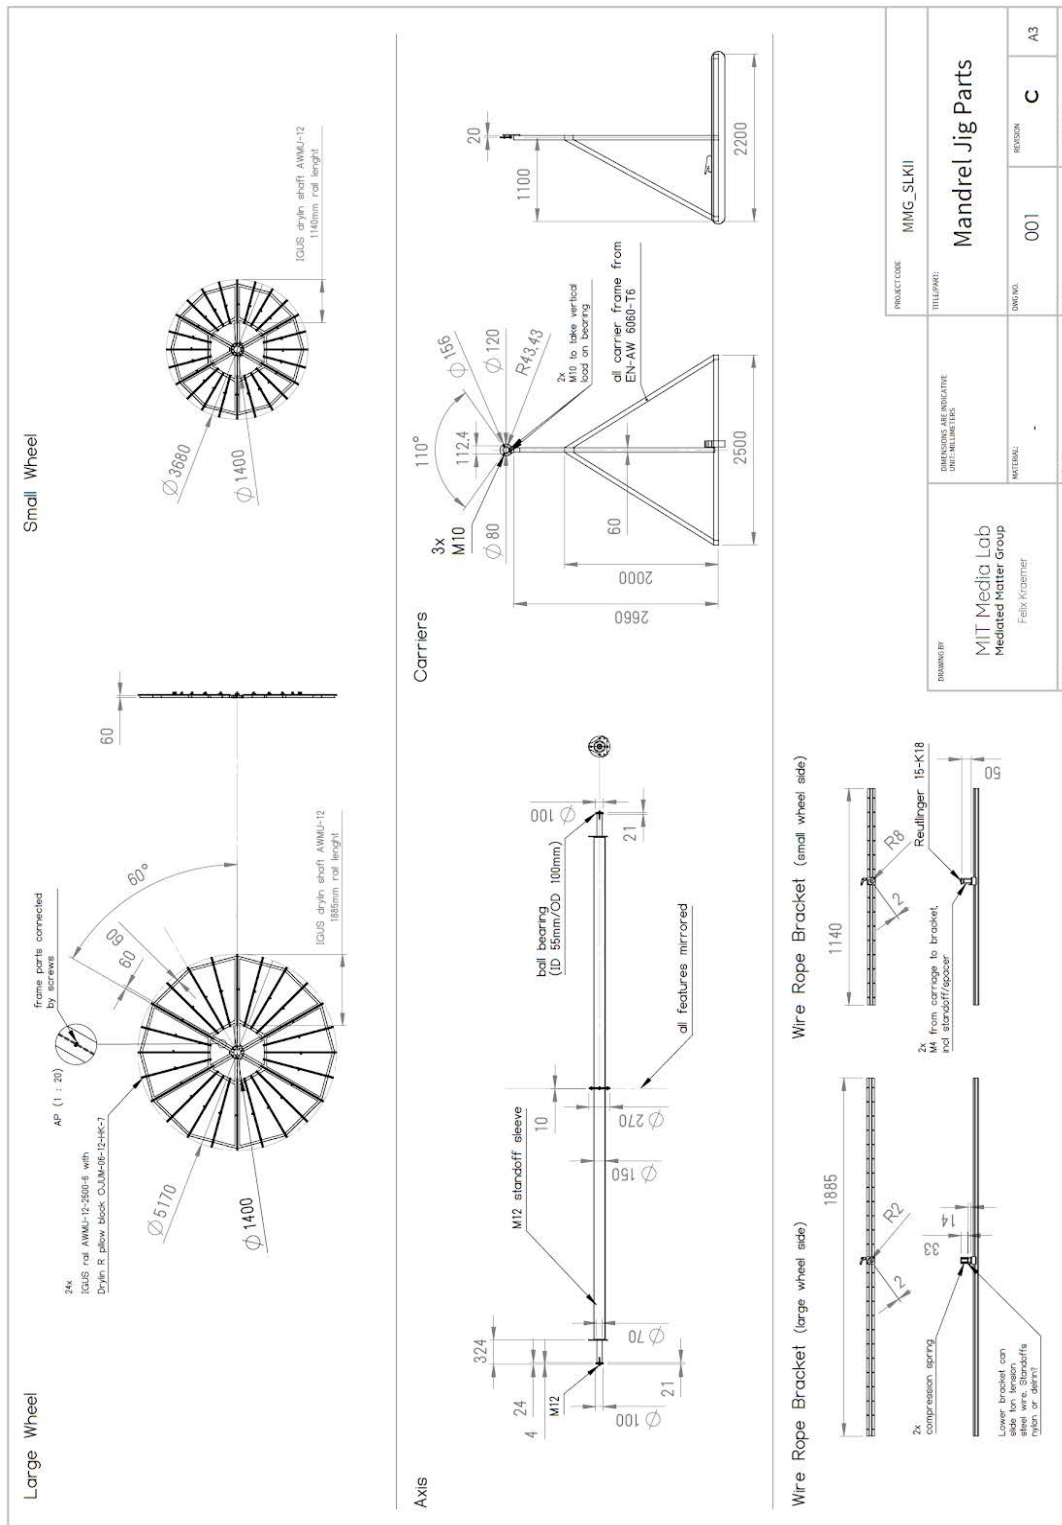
(c) Overview CAD Drawing of Platform: Part Details
